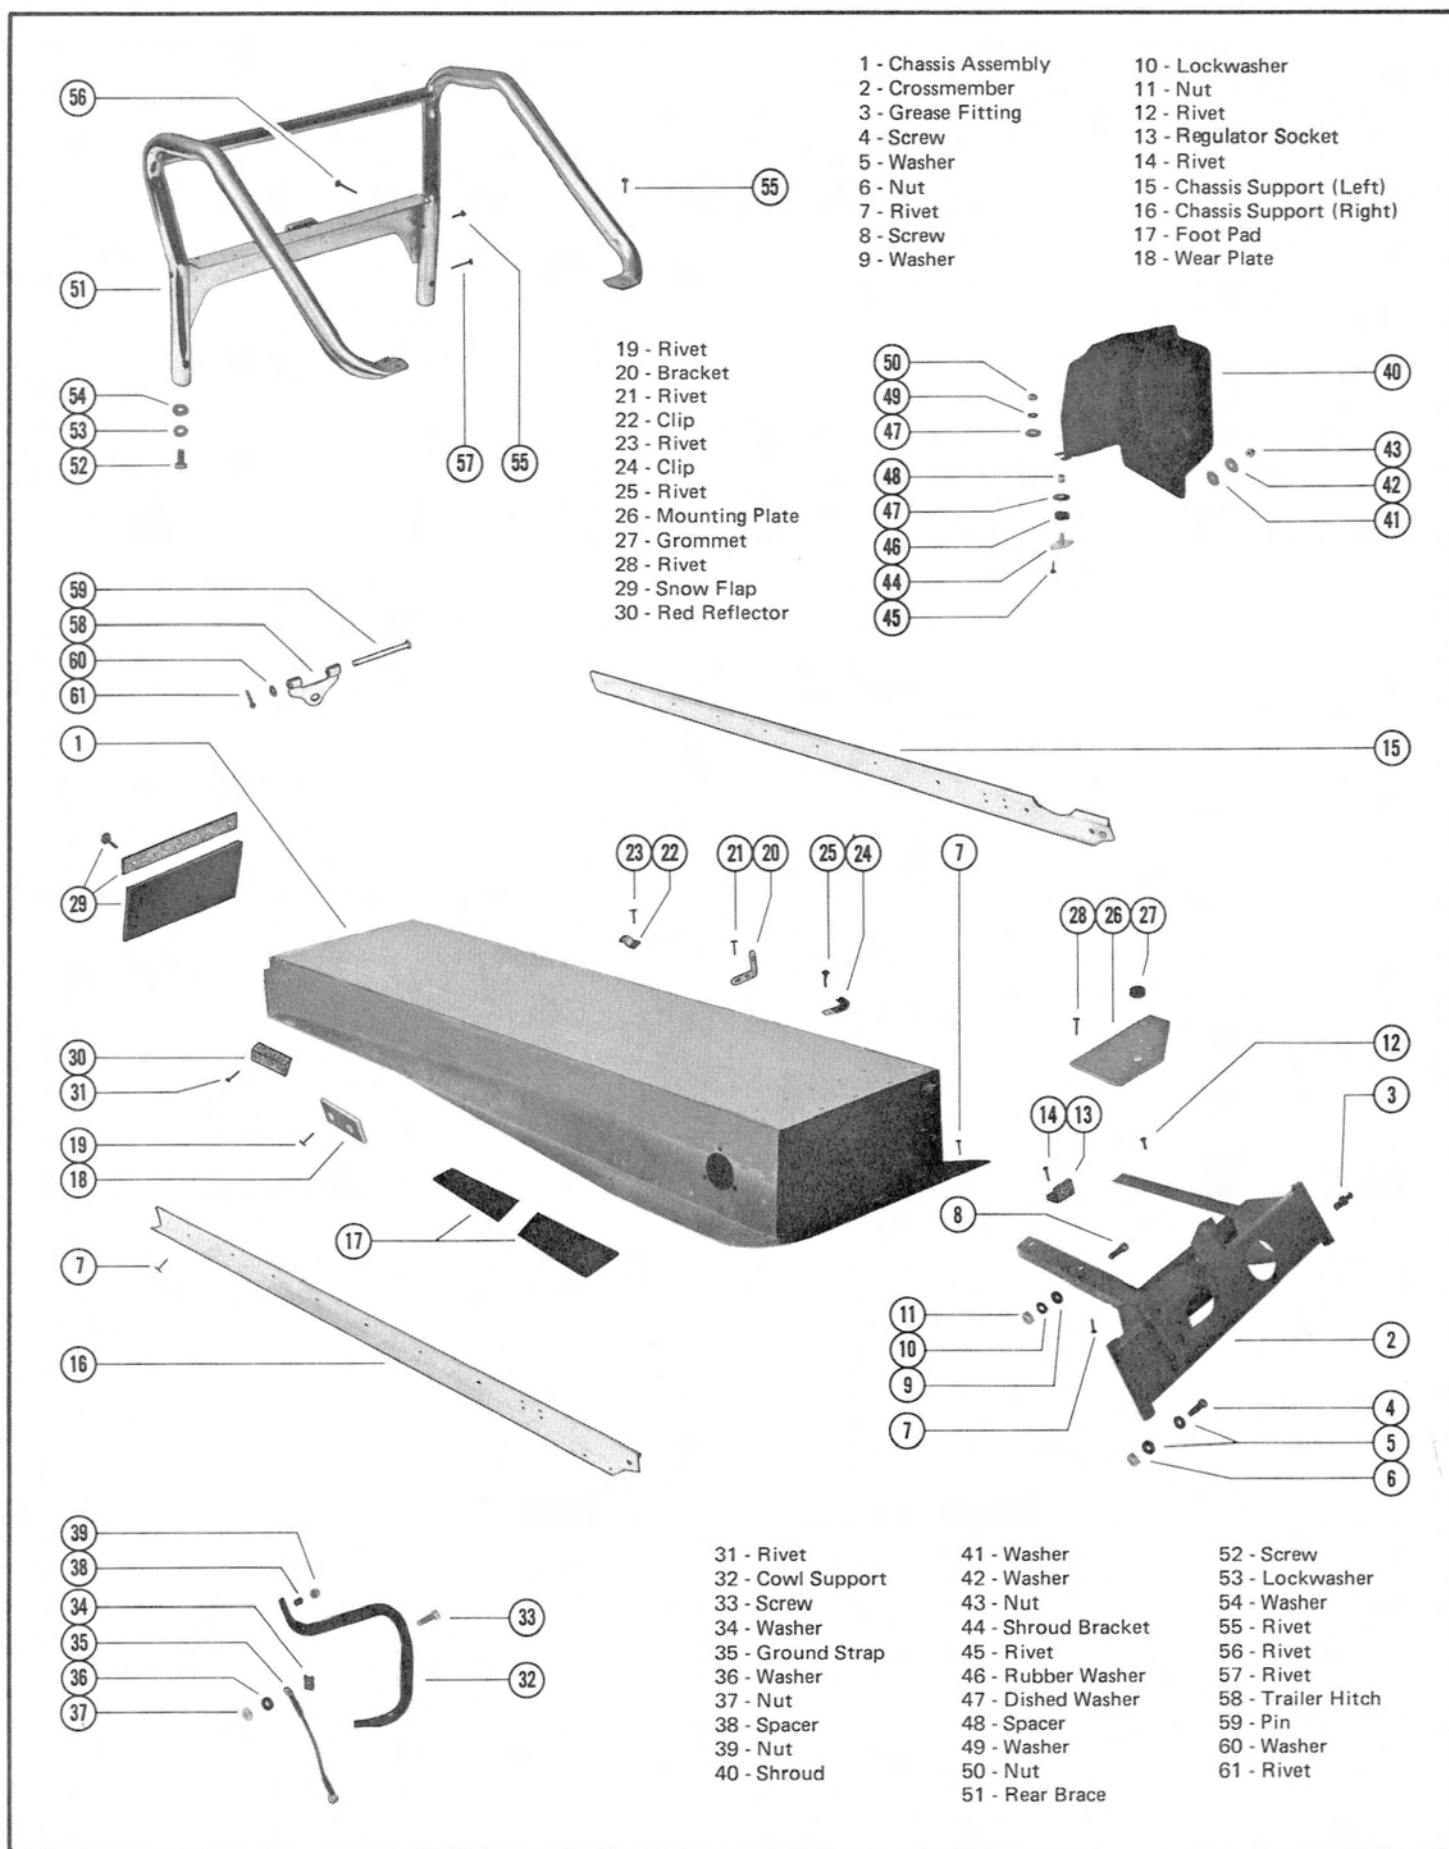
Exploded View - 440 MAX (Chassis Serial No. 3447382 and Below) Chassis
